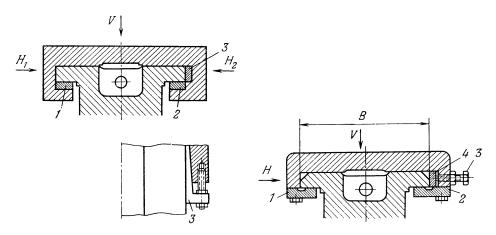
Adjusting clearances in ways Fig. 131. Adjusting clearances in flat ways (general case)
